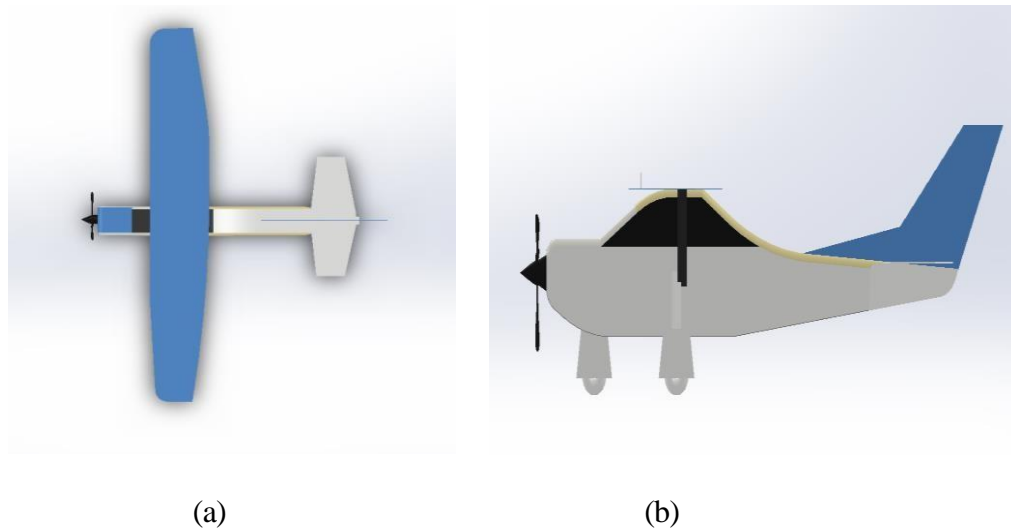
Prototype of 1/5 Cessna 182 SolidWorks model (a) Plan (b) Elevation.
